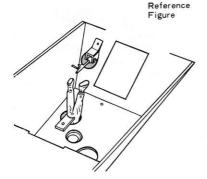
Fixing of Machine Gun Mount and Figure-Fixing Plate
